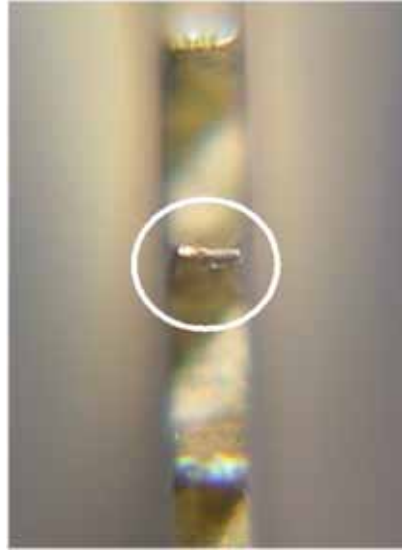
The wheel can be considered true when the last dark tooth on the wheel just barely shows a bright spot.
